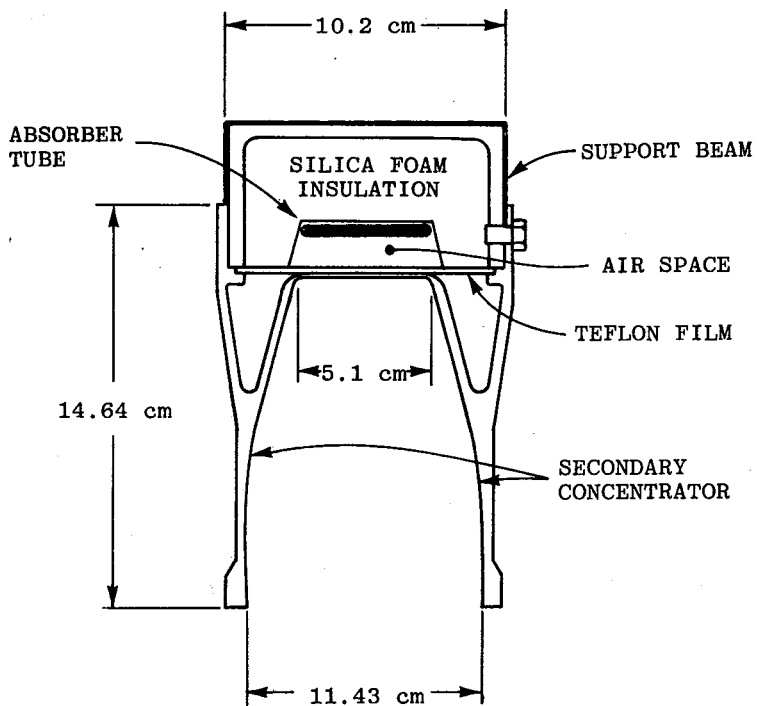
FMSC Heat Receiver Assembly Cross Section.
